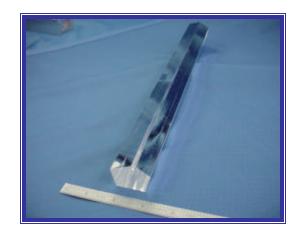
Assembled Wrapping Mold Fixture with Reflective Film & Dummy Al "Crystal" Secured in Place
